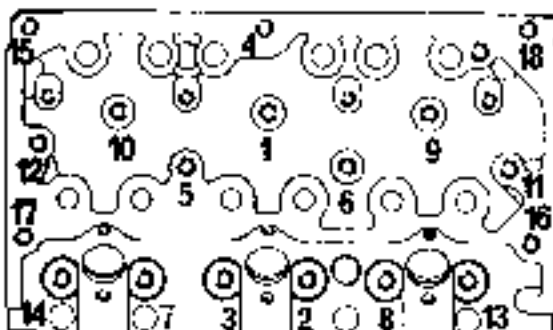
On late production engine (Serial No. 152MA 24411DSL and after), use sequence shown when tightening cylinder head cap screws. Reverse the sequence when loosening cap screws.
